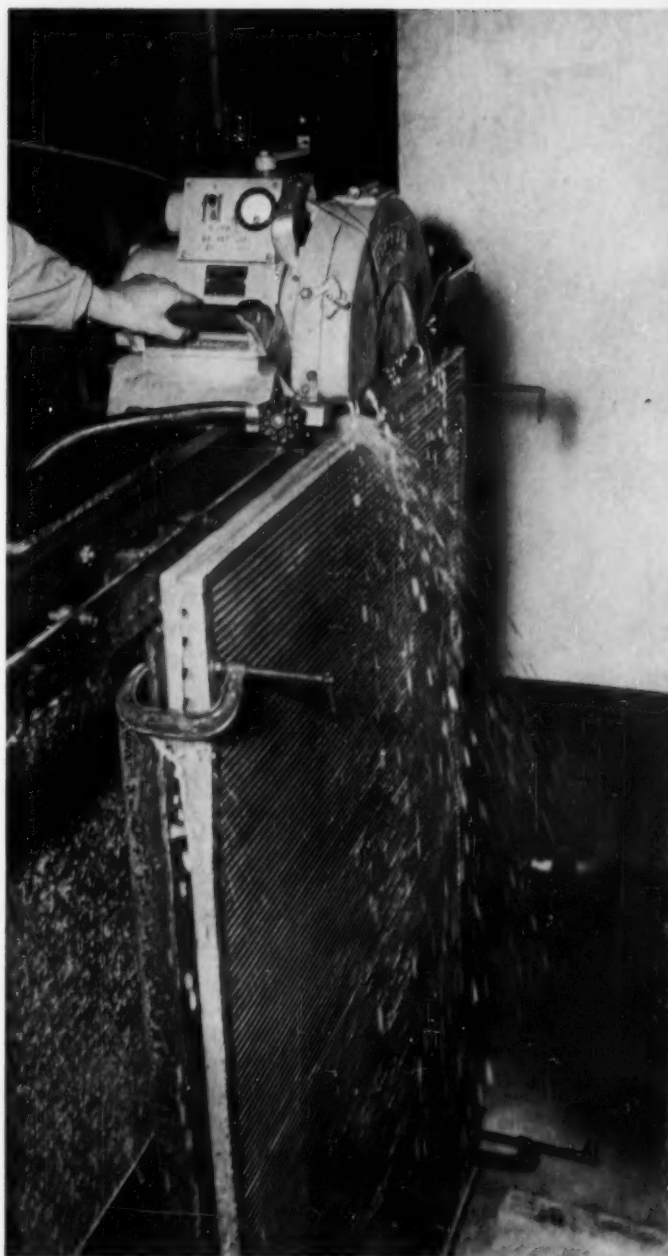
Groove is sawed into end face of molded plate. Molding compounds are so hard that, if cooling water were not used, saw would dull rapidly. (Photos, Haveg Corp.)
